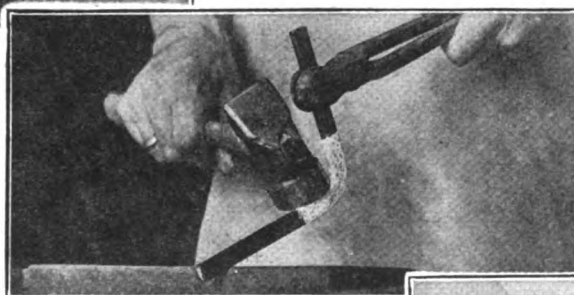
The second step in bending: gradually bend bar until it is L-shaped.
